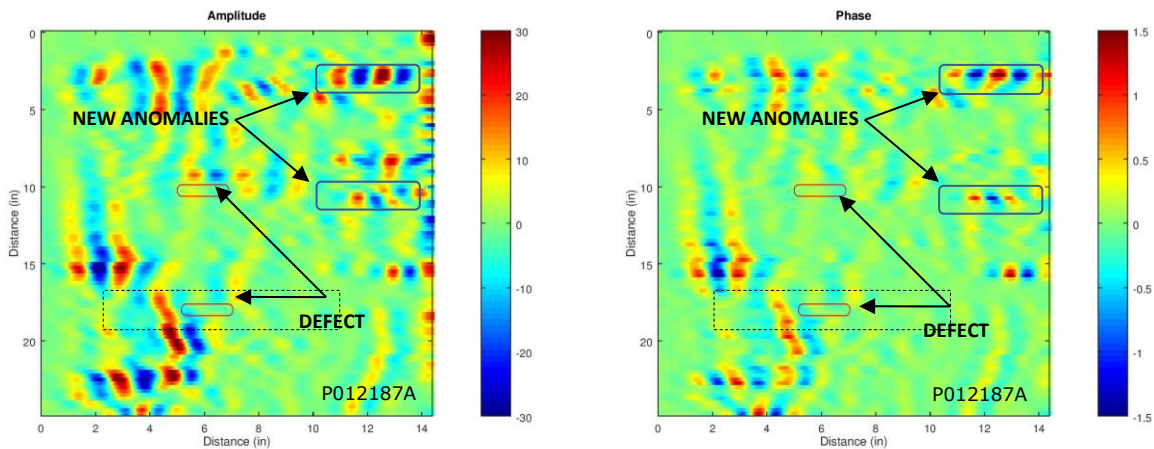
PLATE SCAN WITH EDM DEFECTS
